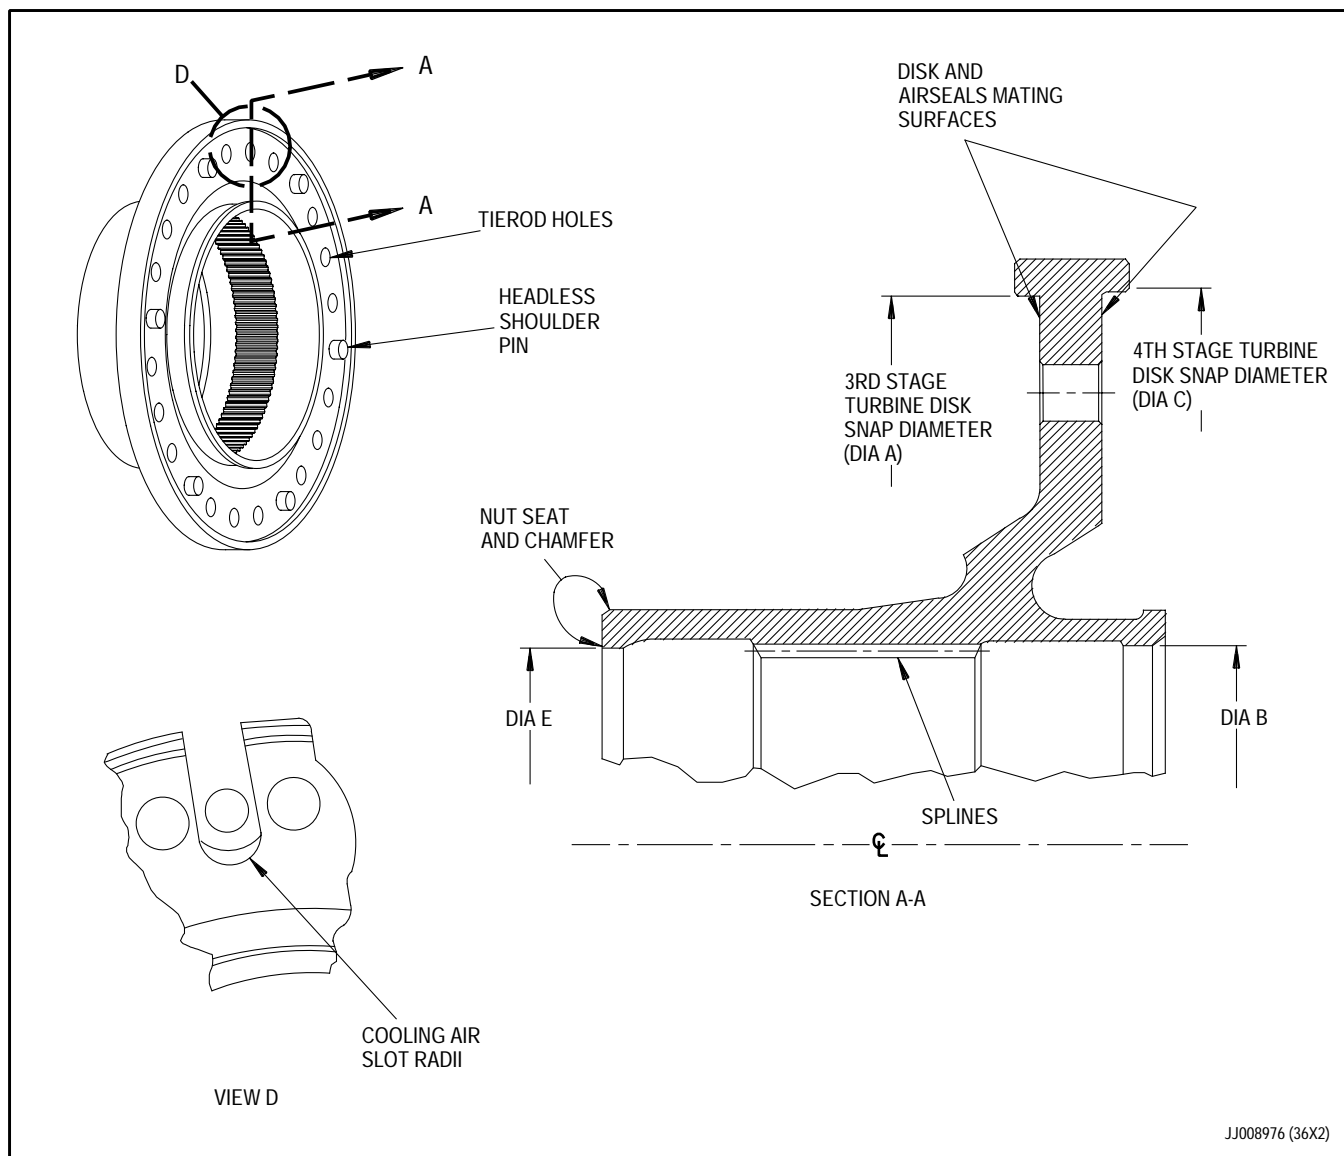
Rear Turbine Hub Assembly - Blend Repair
